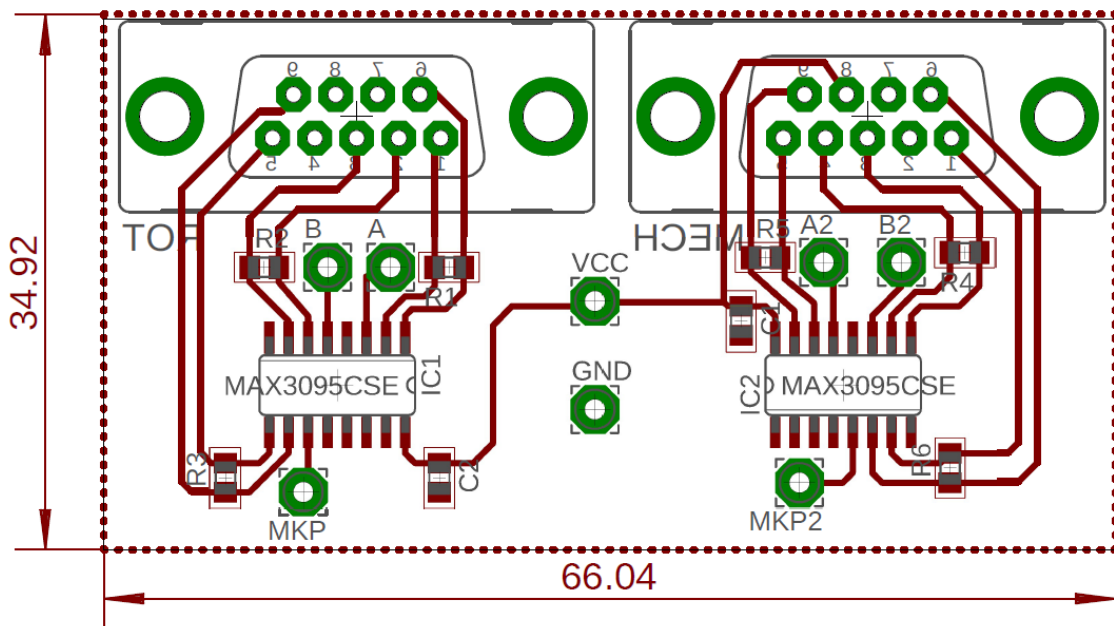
PCB electronic schematic for the encoders integration in FPGA, where ROT stands for first rotational encoder and MECH for second rotational encoder
